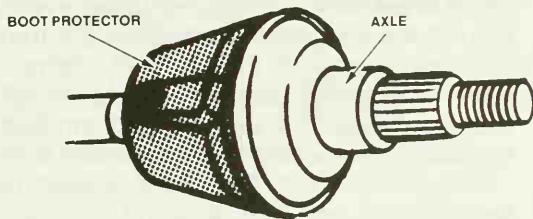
A boot protector is installed over the axle shaft boot prior to removal. (Pontiac Motor Division of General Motors Corporation)
